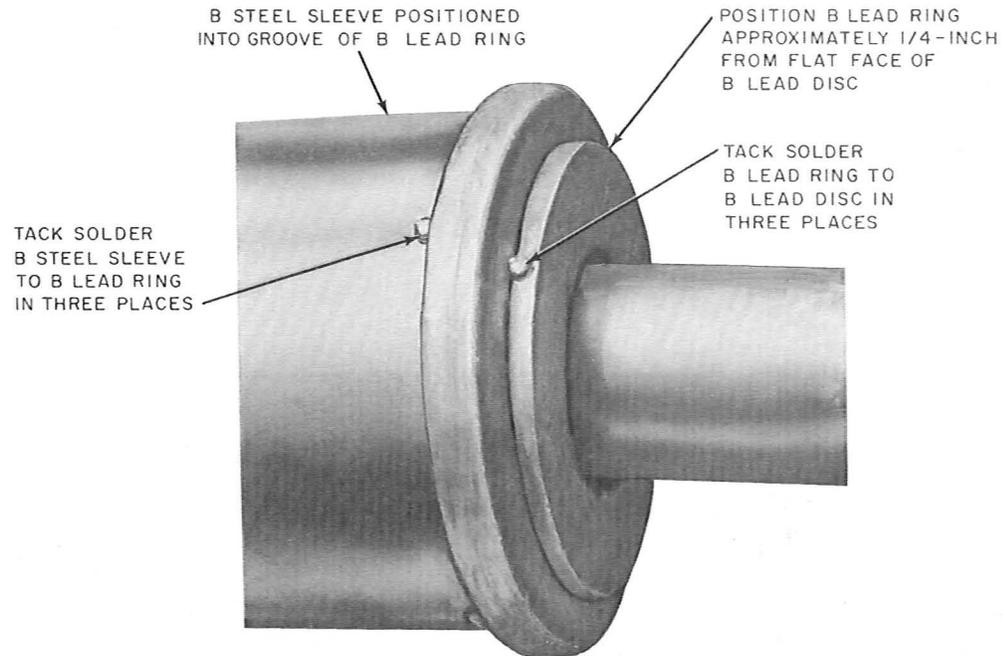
Positioning B Lead Ring and B Steel Sleeve
